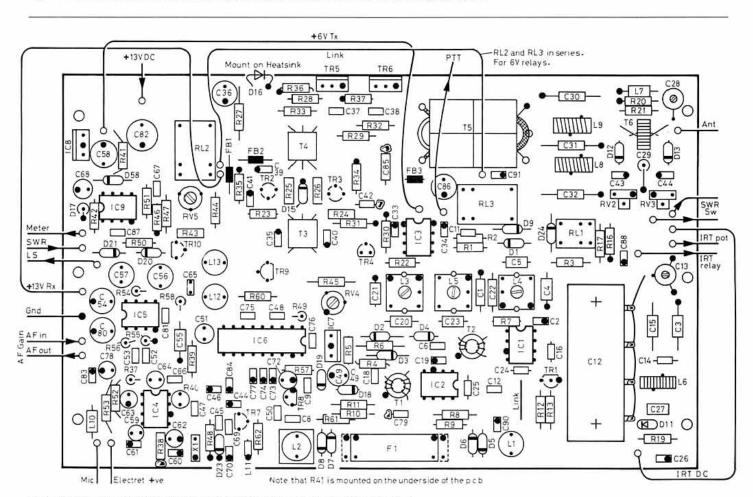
Component overlay (actual size) viewed from the groundplane side of the PCB.
